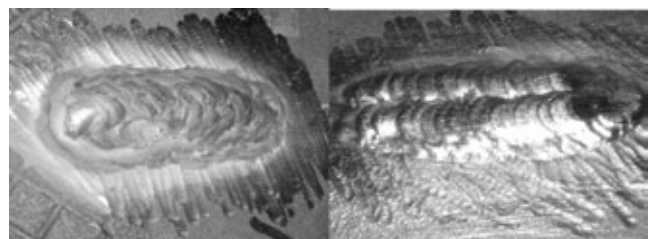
Overview of the repair weld on a casting (AZ91D): a) back of the weld, b) root of the weld
